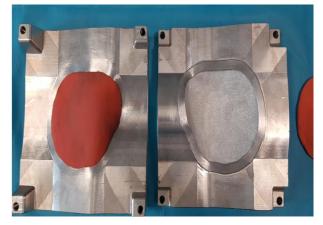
Prototype of the implant realized in technical silicone with aluminium mould
